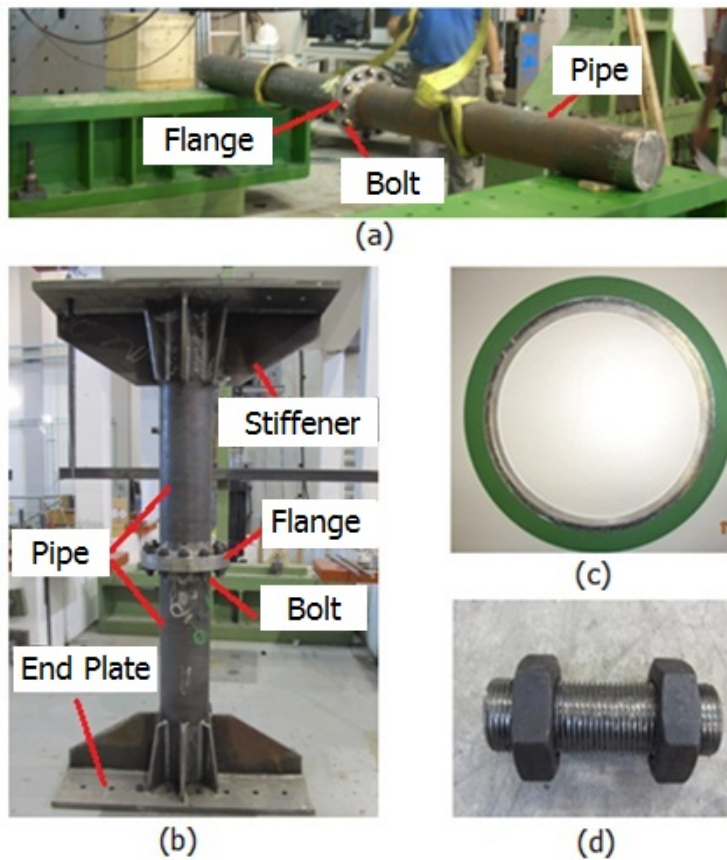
a) Bending test specimen, BS1; b) axial test specimen, AS1; c) a spiral wound gasket; d) a stud bolt.
